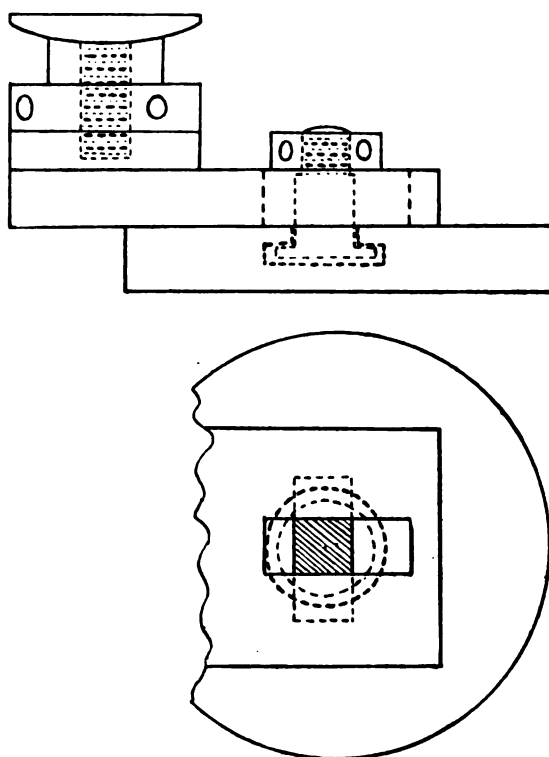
Sectional Views (Elevation and Plan) of the Adjustable Support for the Lens.
